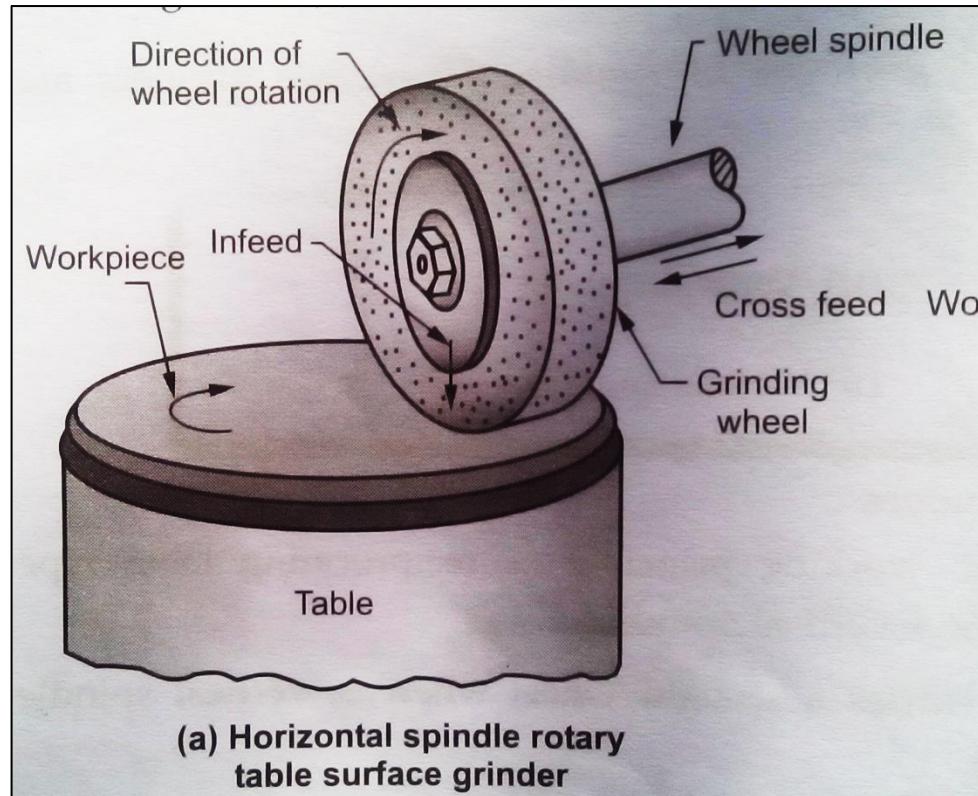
Horizontal Spindle Surface Grinding Machine
